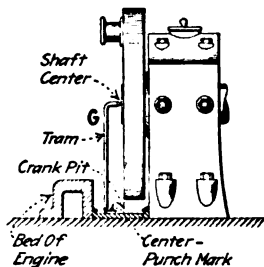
Showing a method of gaging the wear of a main bearing.
